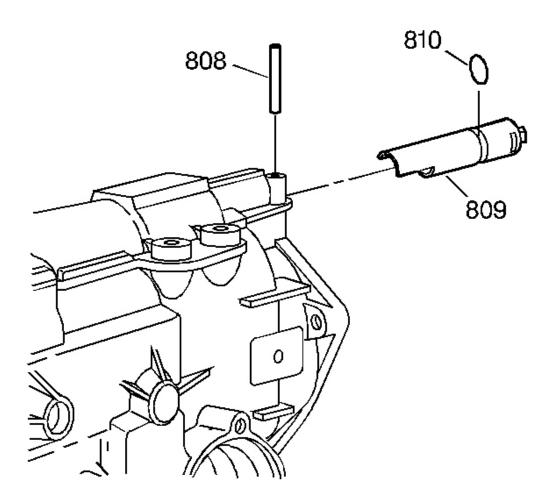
View Of Park Pawl Actuator Guide O-Ring Seal Courtesy of GENERAL MOTORS CORP.
